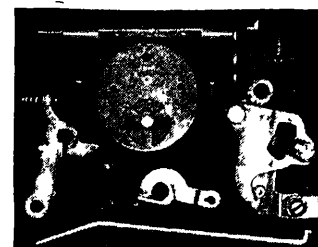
Group parts of choke circuit. Examine parts in all groups and replace any that show wear. Use Carter Repair Kit
